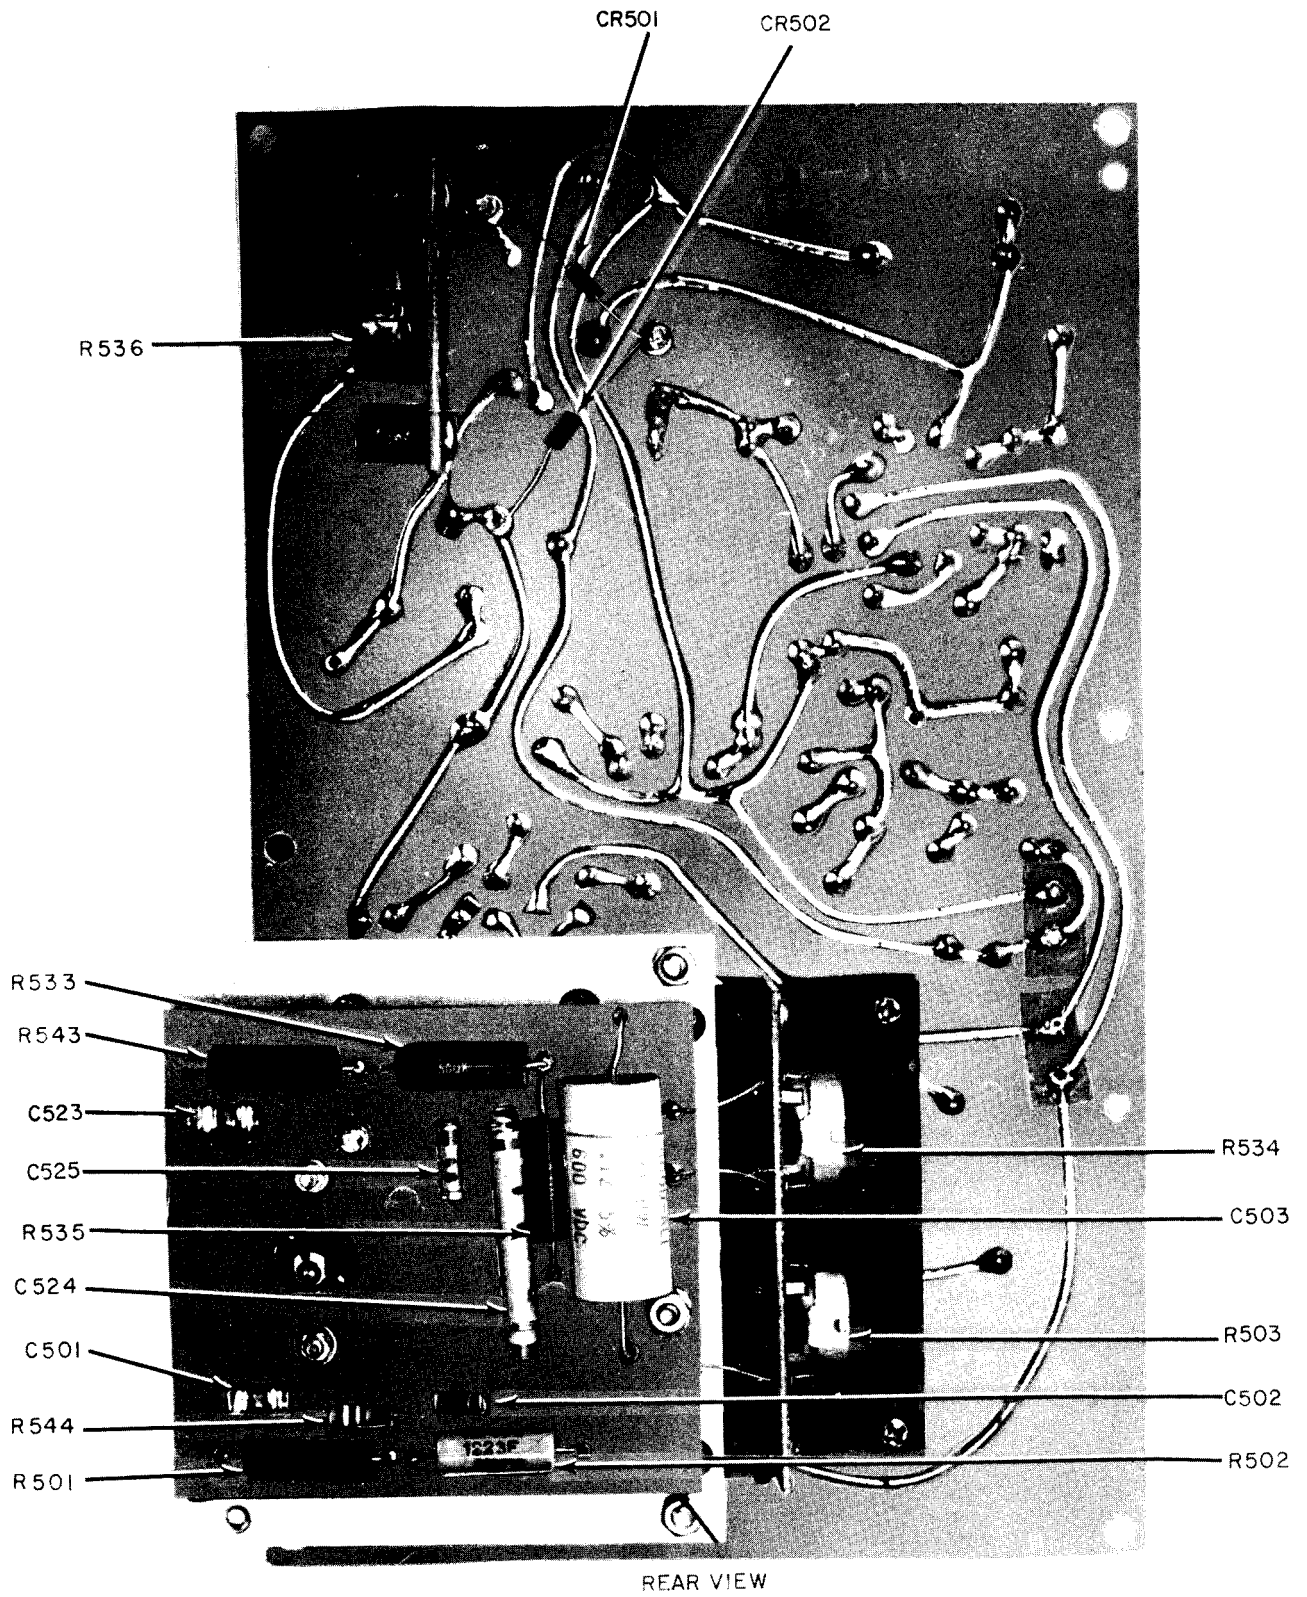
Voltmeter, Electronic ME-202B/U AC to DC Converter and Range Switch Assembly (Sheet 1 of 2).
